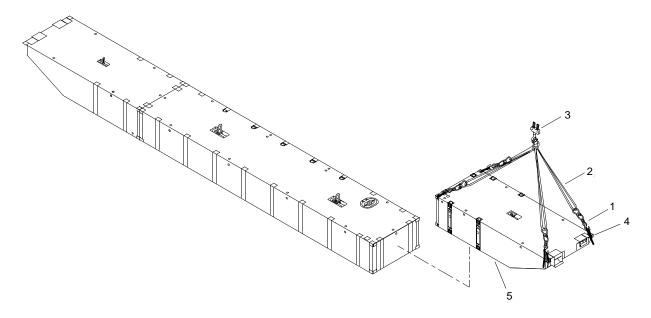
Assembly of Module Strings on Deck of Sealift Vessel
